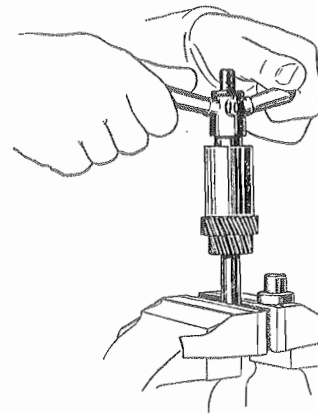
REMOVING DRAWN CUP NEEDLE BEARINGS
